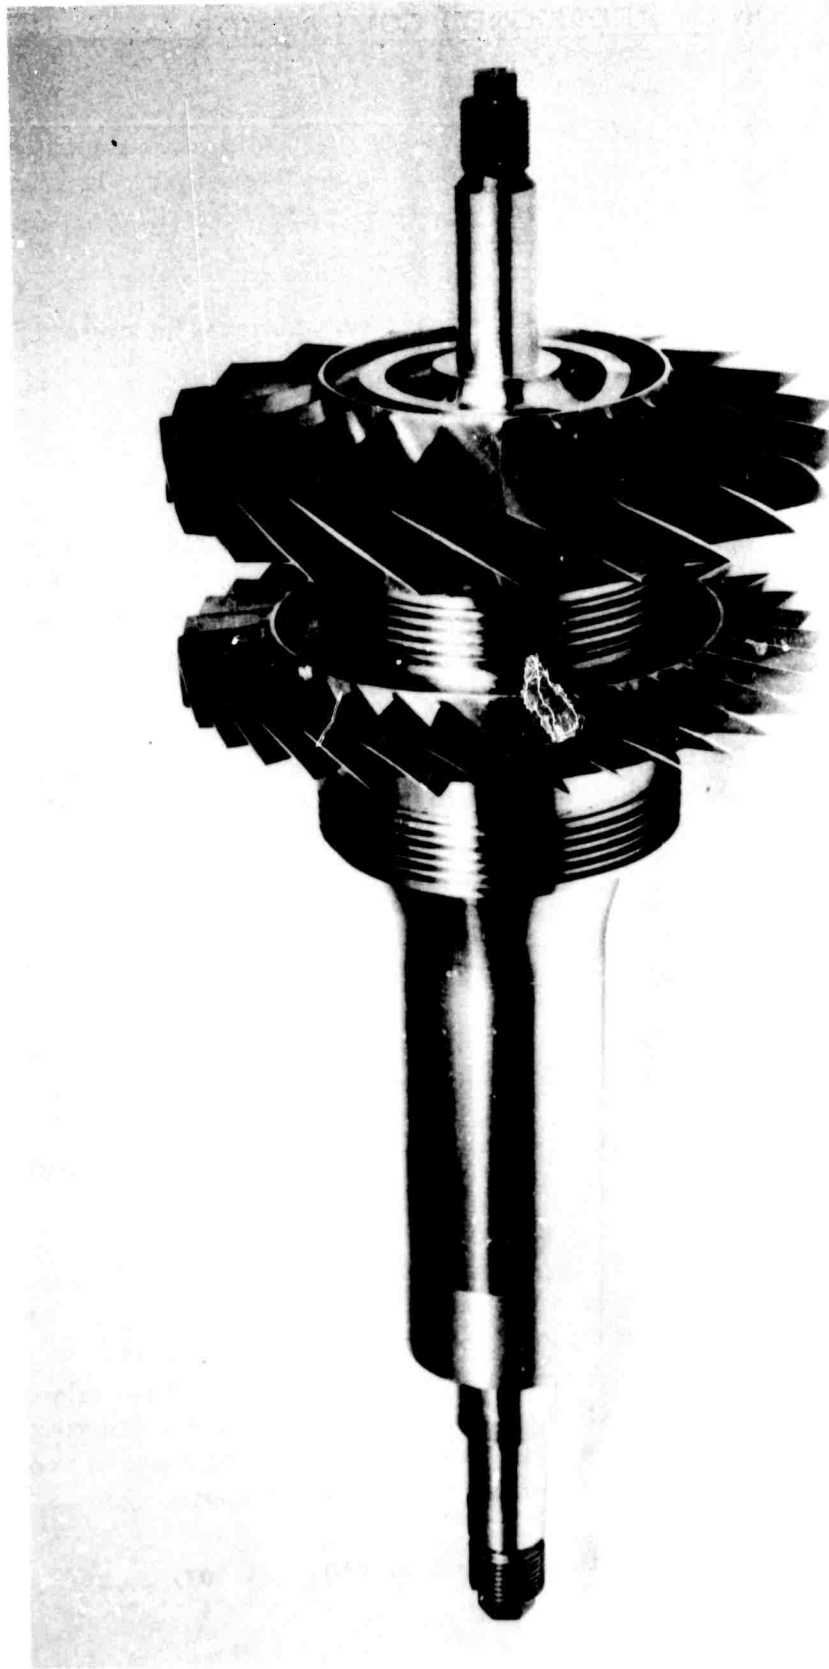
Redesigned Welded Rotor Assembly.
